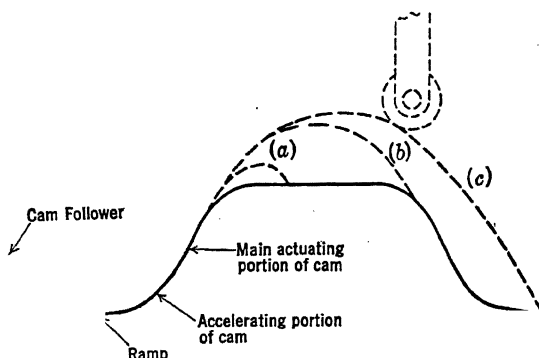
Flat-topped cam lobe showing path of cam follower as speed is increased.
